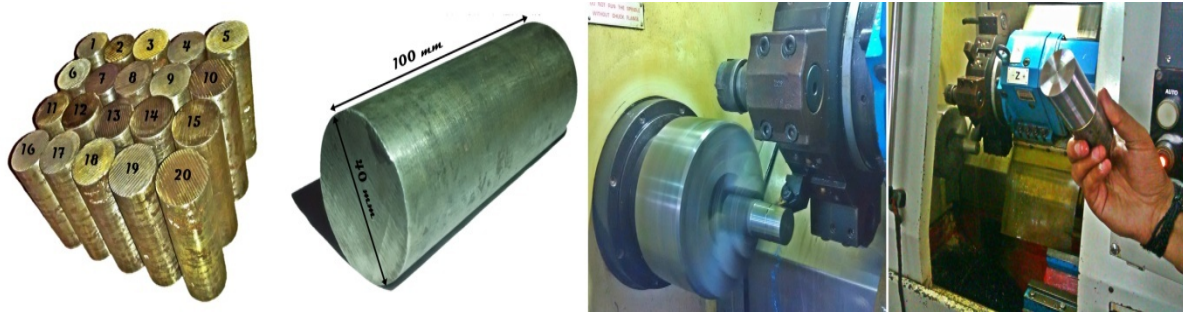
Total Number & Dimensions of and Work-Piece Setup for Machining
